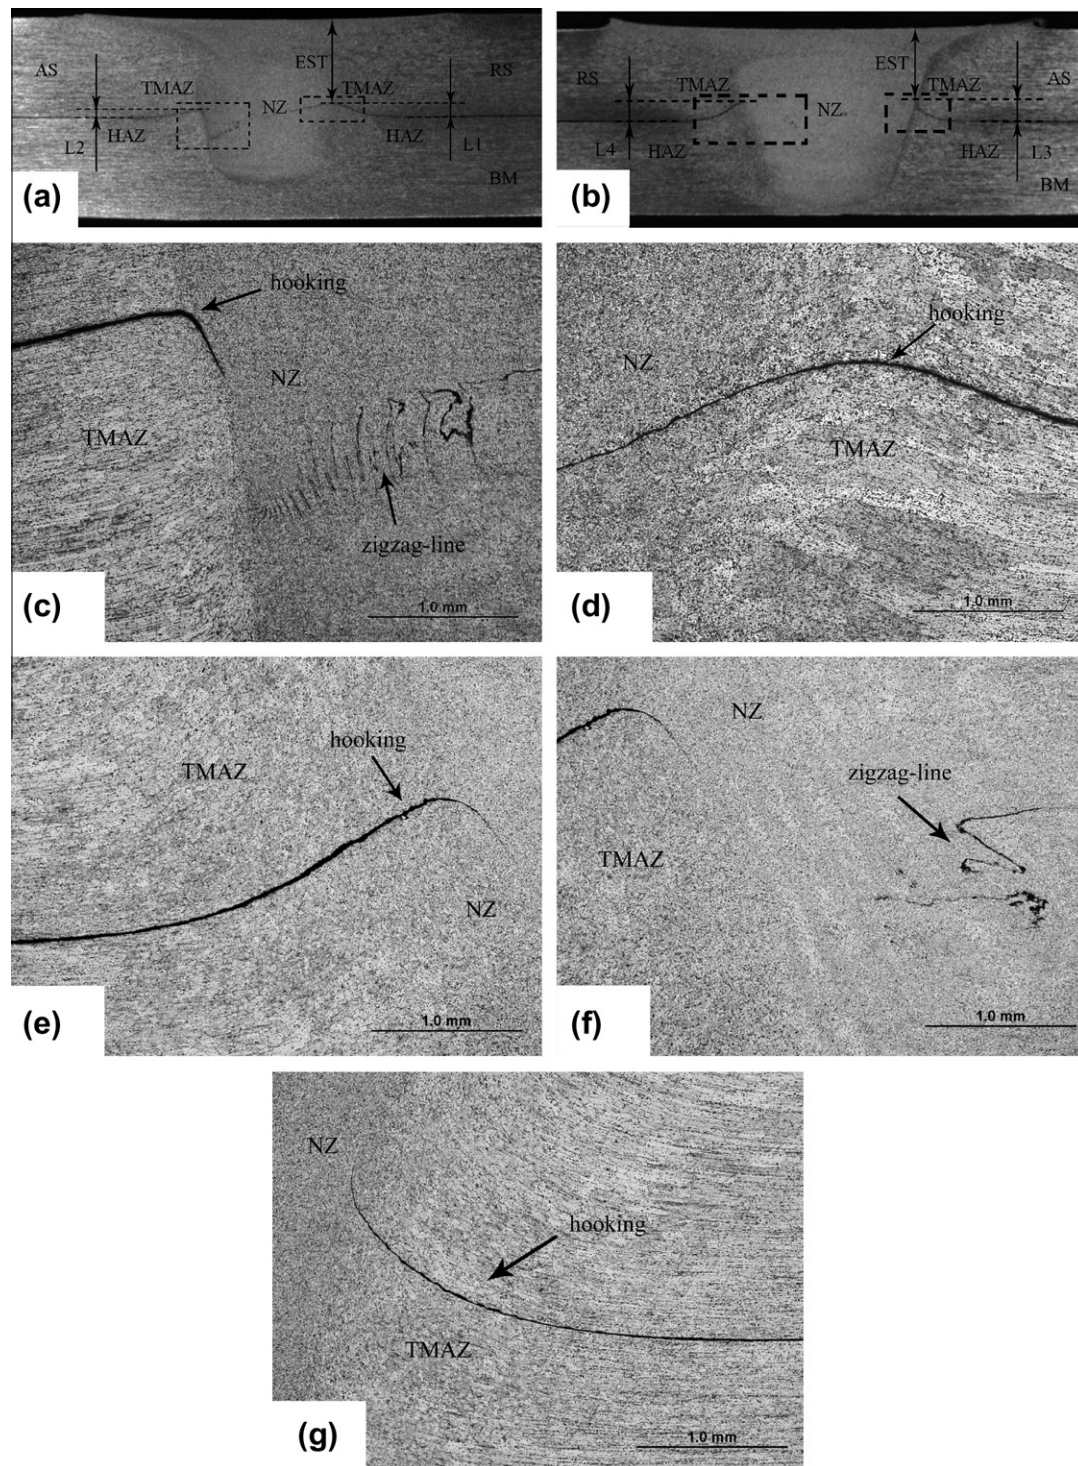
Transverse cross section of the weld zone with various welding conditions: (a) the SPW overlap joint, (b) the DPW overlap joint. (c) A further magnified image of the left dashed box in (a), (d) a further magnified image of the right dashed box in (a), (e and f) a further magnified image of the left dashed box in (b), and (g) a further magnified image of the right dashed box in (b).
